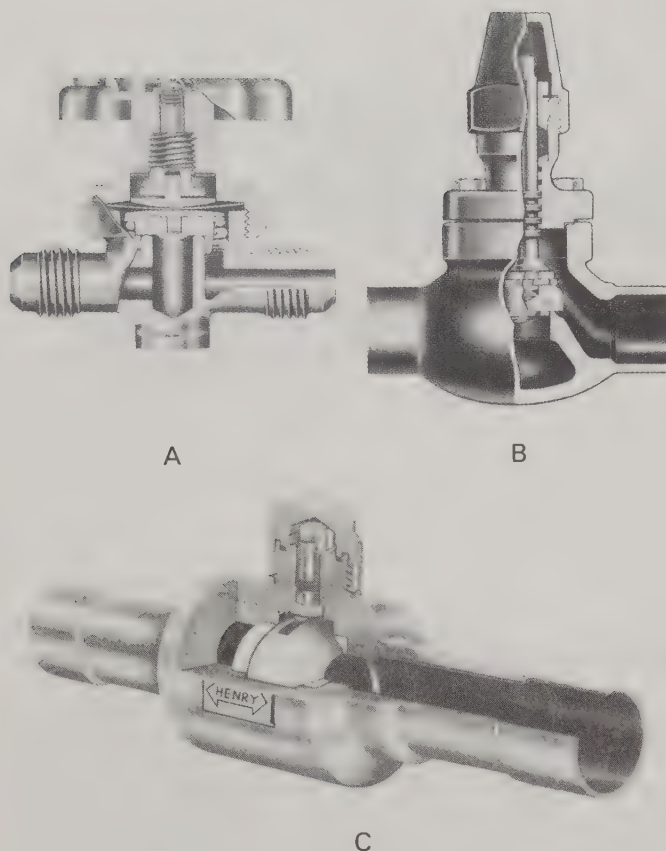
Manually operated (hand) valves. A—Diaphragm-type valve. B—Globe-type valve. C—Ball-type valve (Henry Valve Co.)
